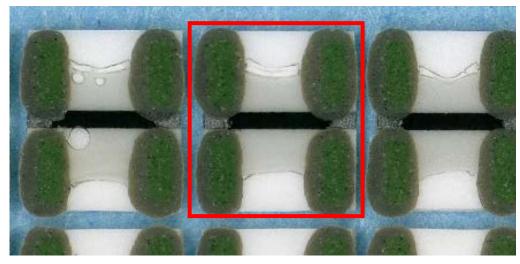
Glass Test Board GTB200 with chip models 1108 sizes, partially cleaned
